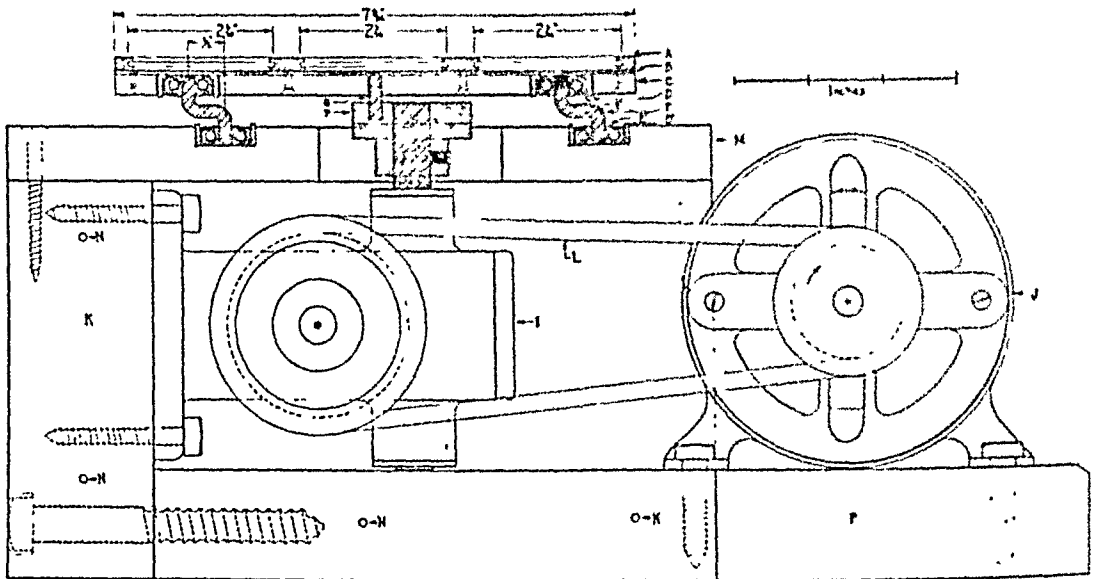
FIGURE I.—Side view of the rotary machine showing the details of its construction. A. Slide holder. R. Brass base. C. Oak base. DD'. Bearing guides. EE'. Combination radial and thrust ball bearings. F. Connecting rods.
